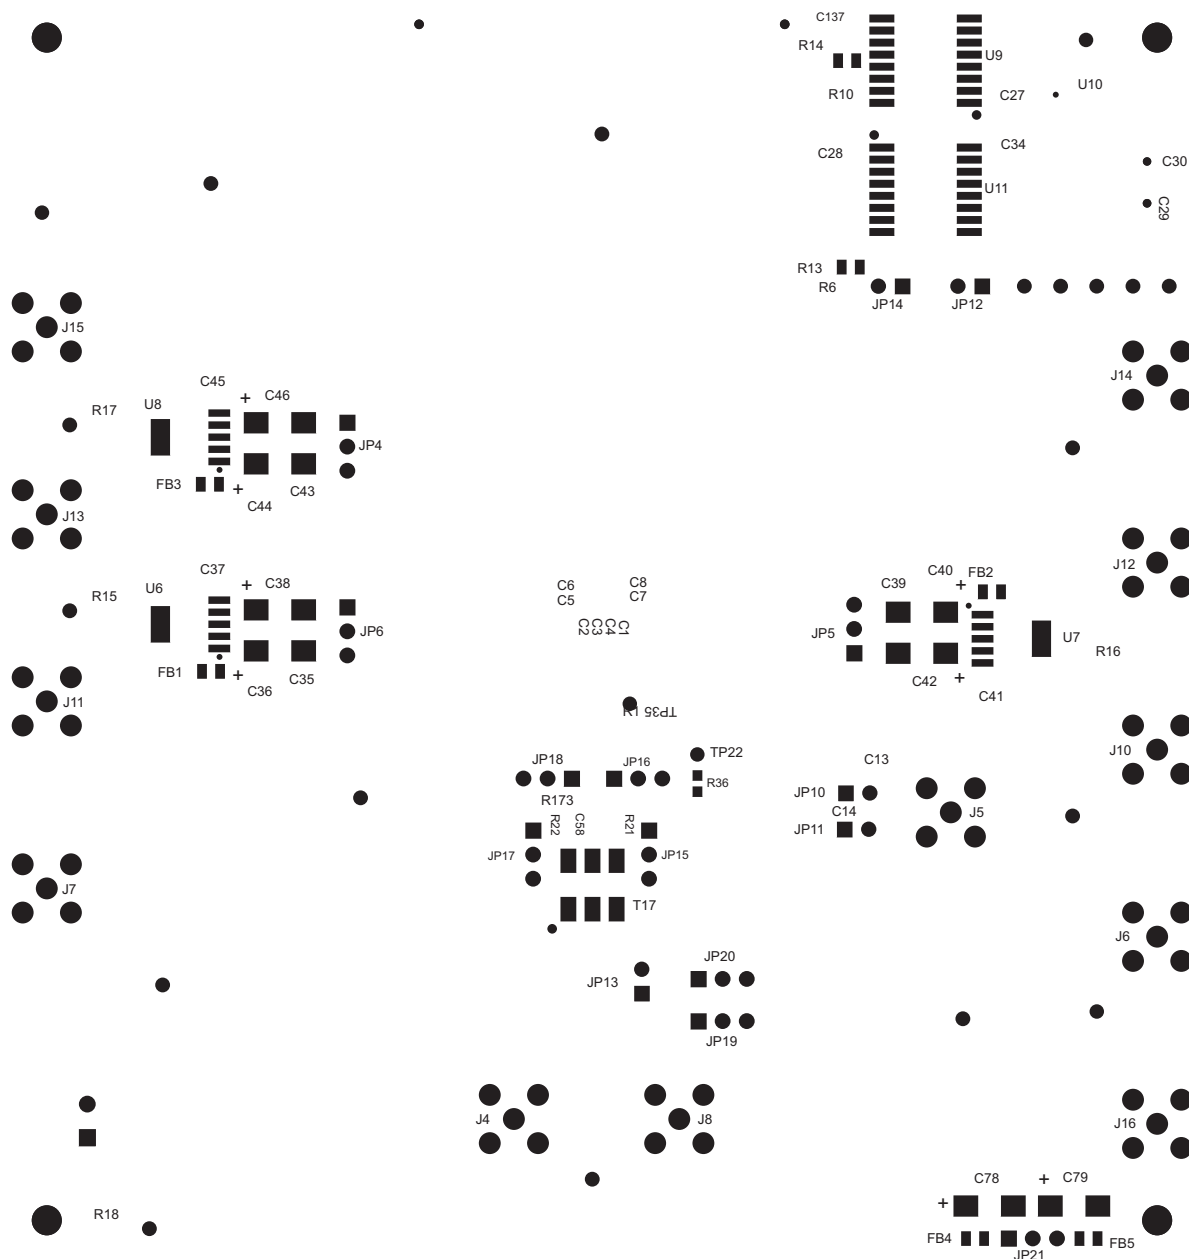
ADS5294EVM Bottom Layer Assembly Drawing – Bottom View
